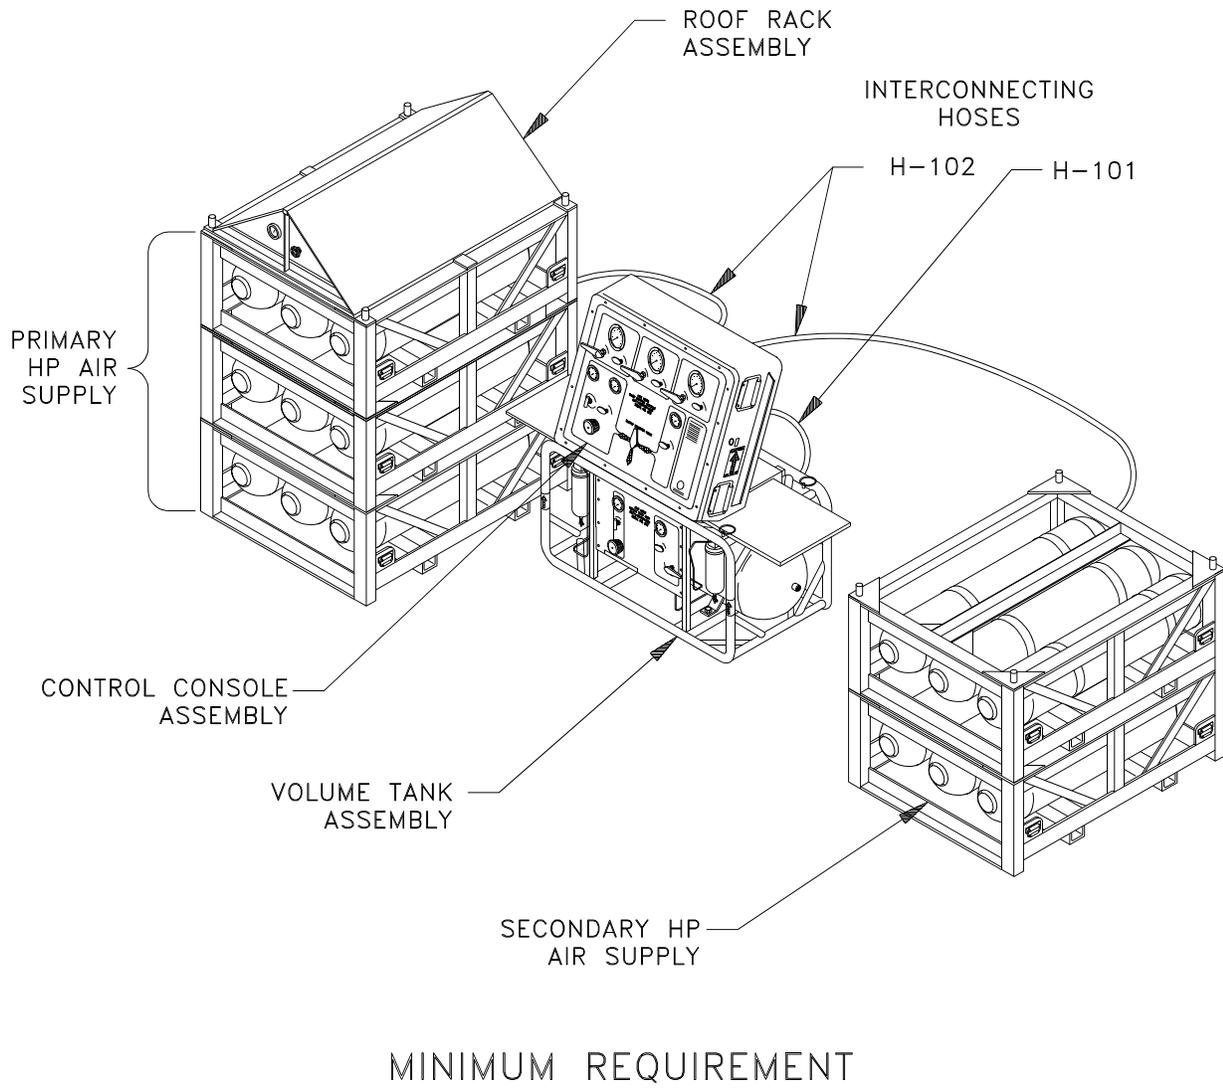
Lightweight Dive System (LWDS) MK 3 Mod 0, Configuration 3
